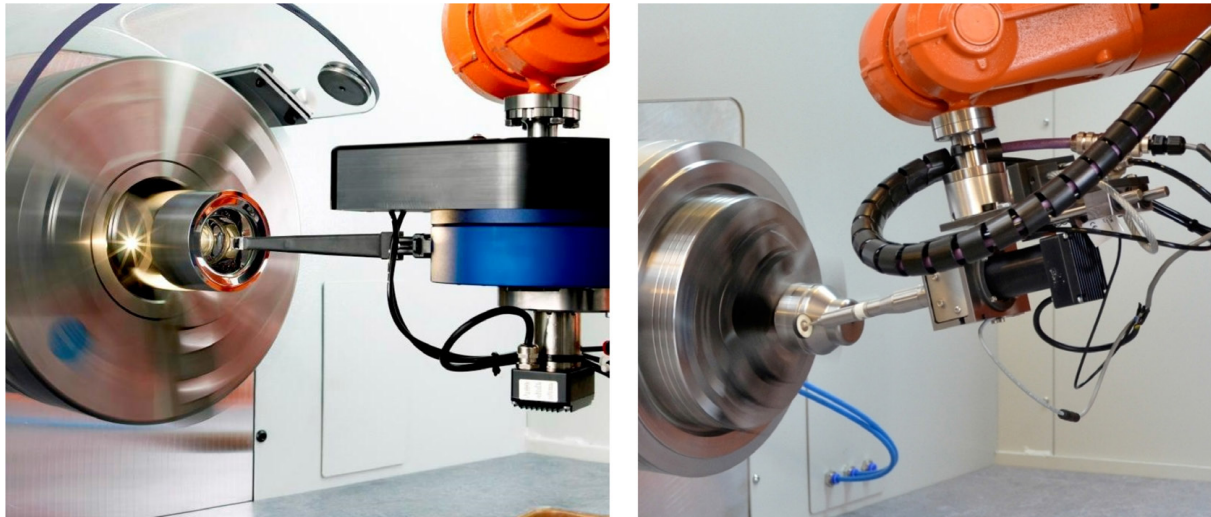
Polishing module providing oscillating linear (left) and rotating tool movement (right).
